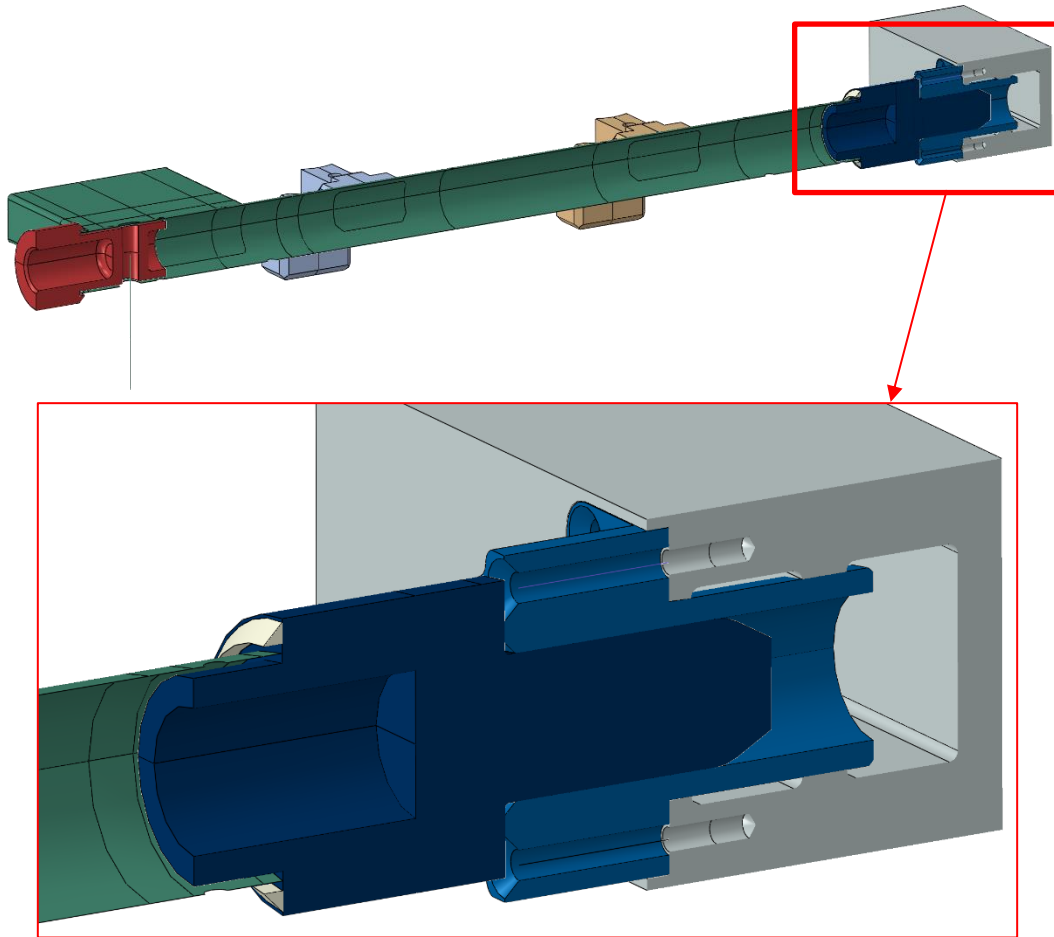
Finite element model - connection between the base stand and the outrigger - cut view
